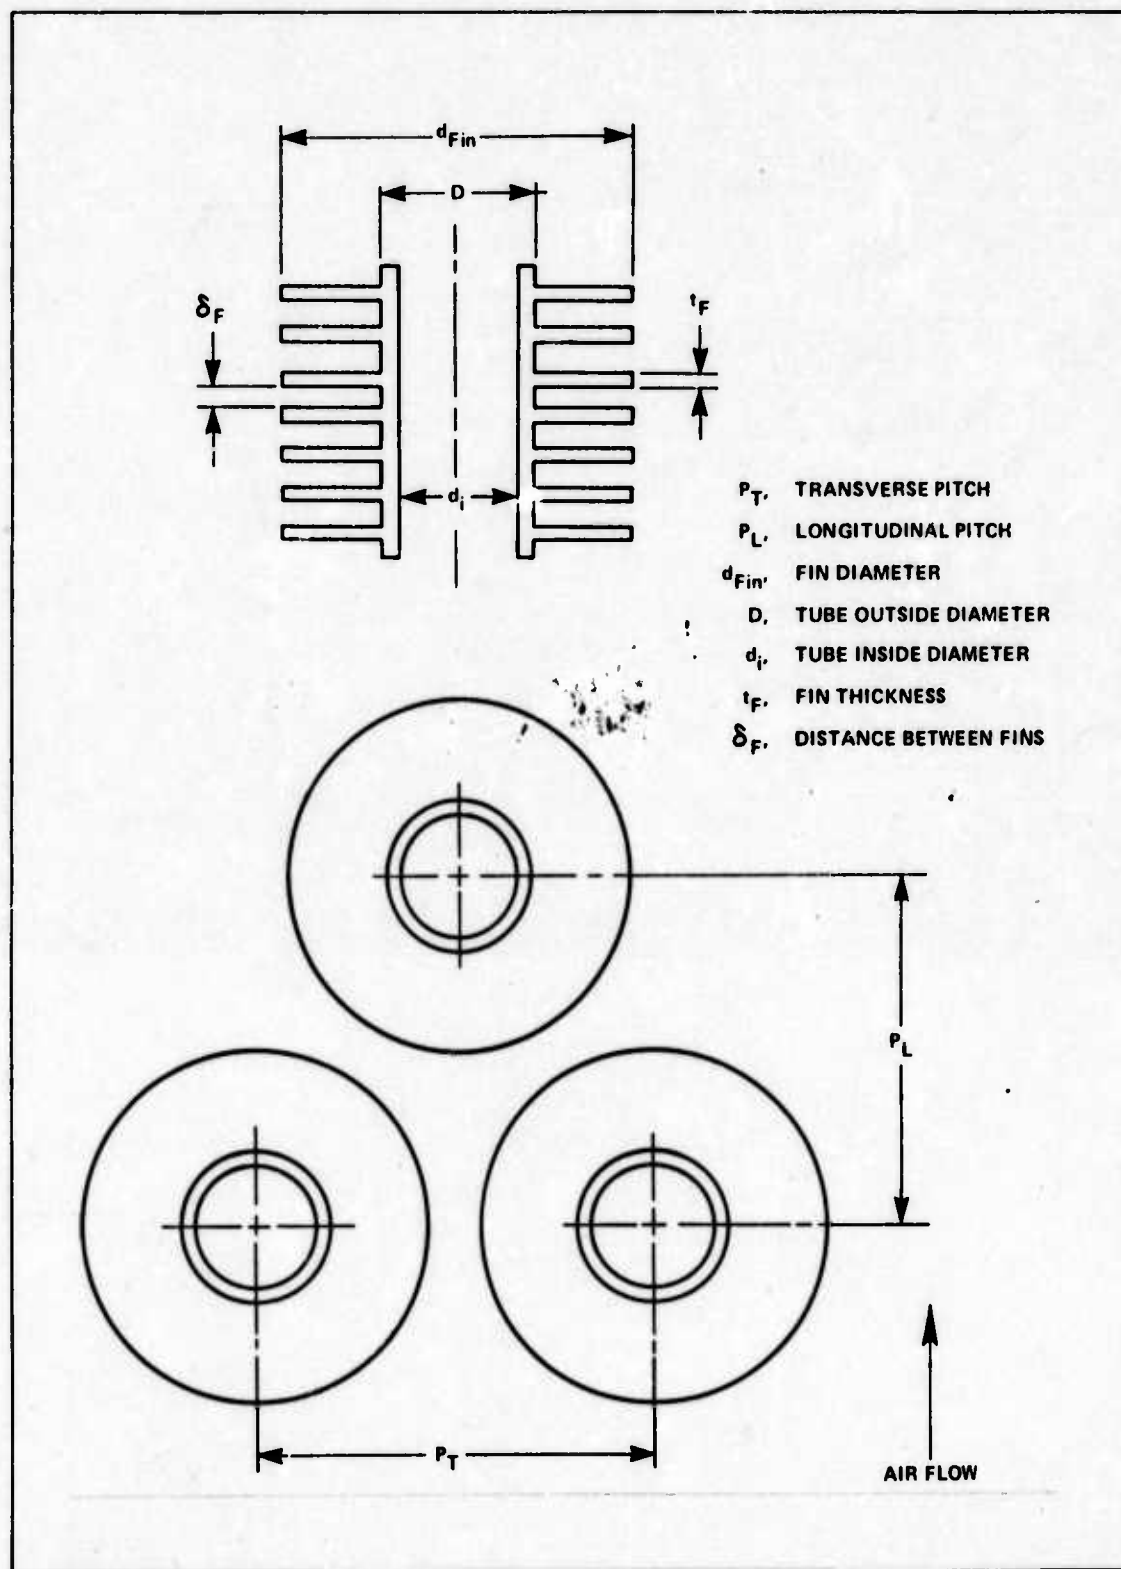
Geometry of Helical Disc Fins on Round Tubes (Ref. 111, p. 97)
